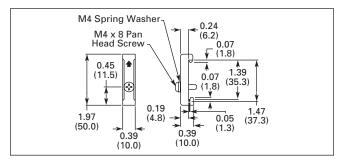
PFP-M DIN Rail End Stop — Approximate Dimensions in Inches (mm)
